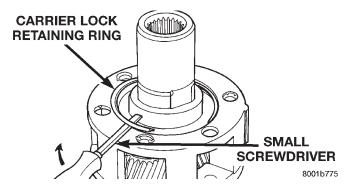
Input Gear, Front Thrust Washer, And Carrier Lock Ring Installation
